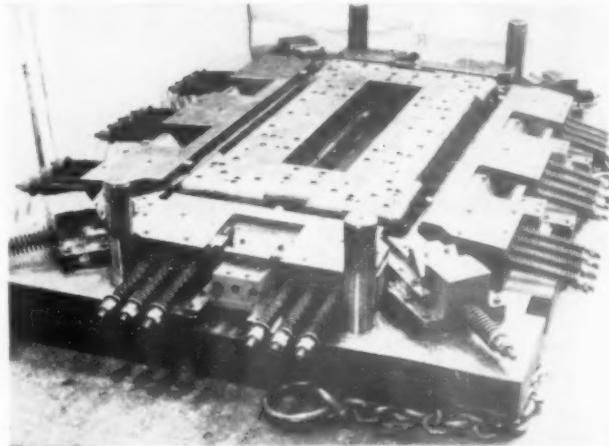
Above is a view of the cam flange die used to form under the flanges on the freezer lid panel.
